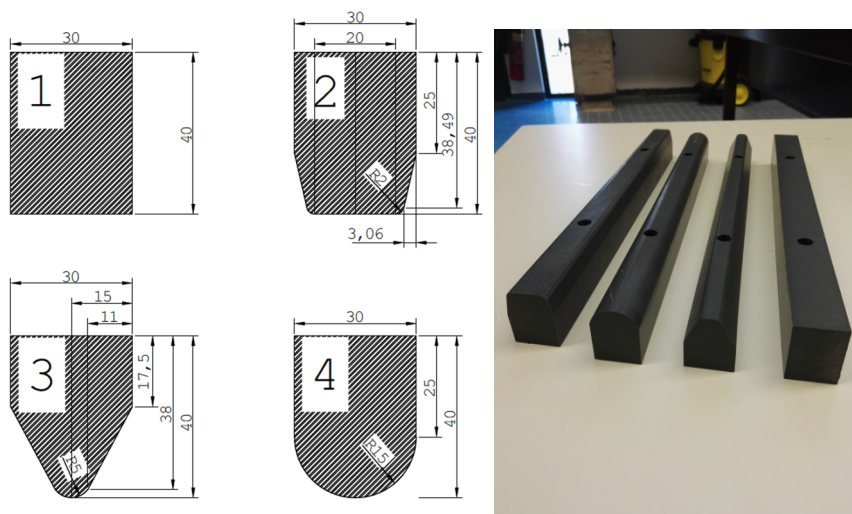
(L) Dimensions lower edges & (R) Picture of the 4 different used lower edges
